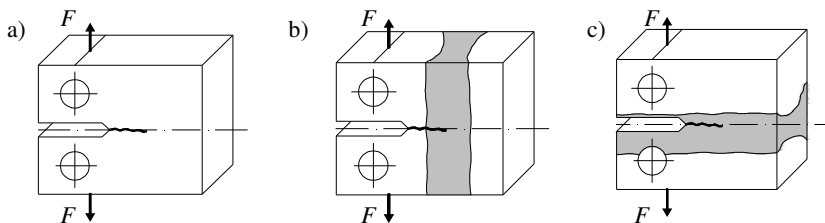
Scheme of crack propagation in CT specimen: a) basic metal; b) crack is perpendicular to the weld; c) crack is along or near the weld
